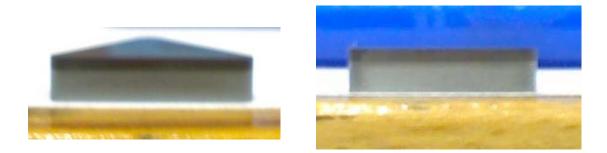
TNMN-323H, PcBN turning insert- top and side views
